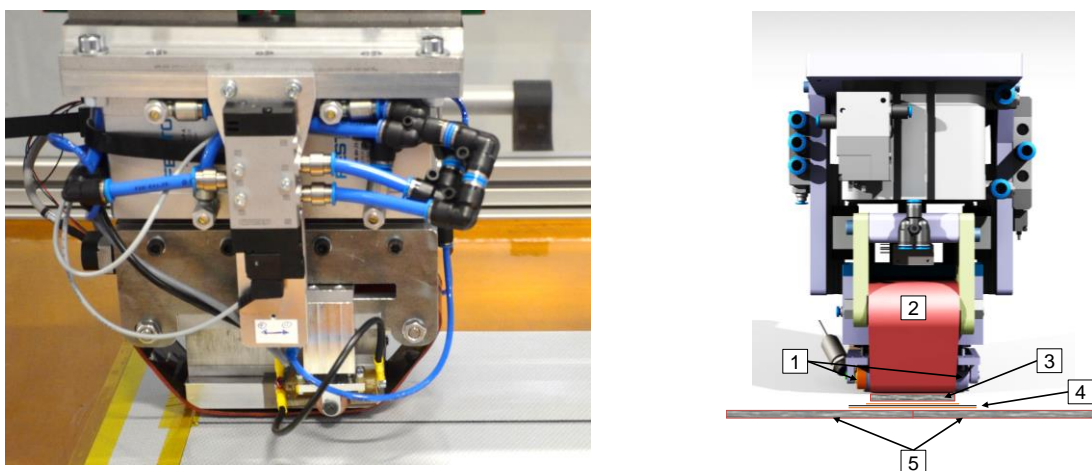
End-effector for continuous resistance welding in side view (left) and front view (right) [16]
